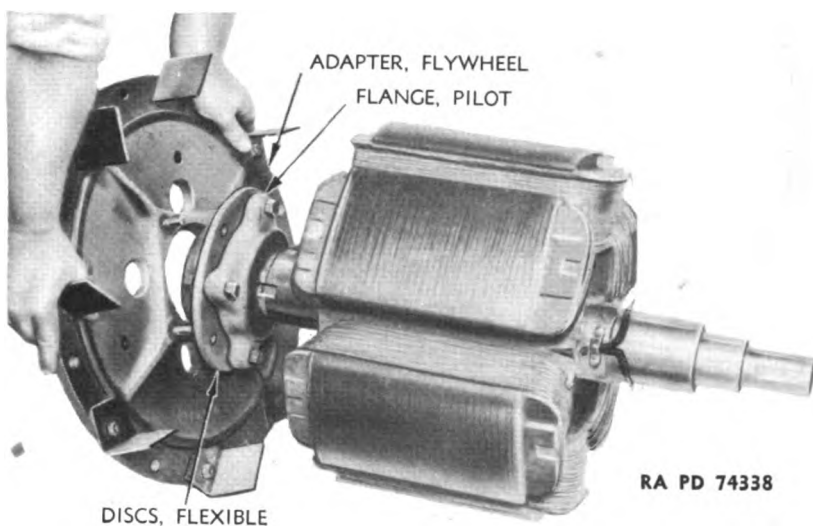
Flexible Coupling Flywheel Adapter Removal
